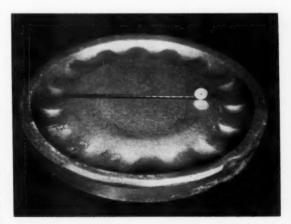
Closed dies formed this refractory-metal blocker shape from a "pancake." Completion of the forging is subsequently accomplished in finishing dies.
